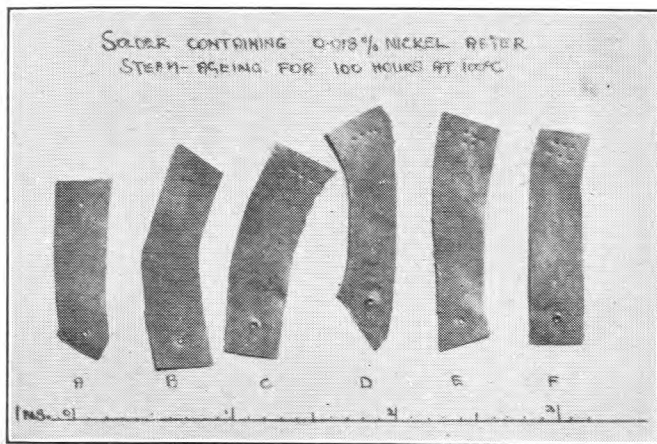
TEST PIECES CONTAINING NICKEL AFTER STEAM-AGING.
